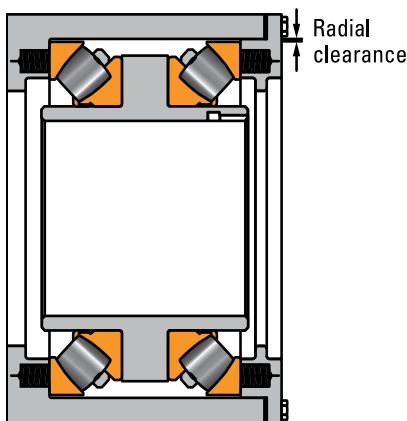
Face-to-face mounting arrangement of a TSR-EM bearing set.
